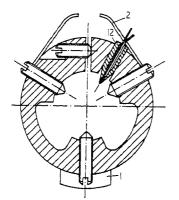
(b). Details of the clamping device, cut through A-A of (a). 1, cams; 2 springs; 12, thermocouple.
